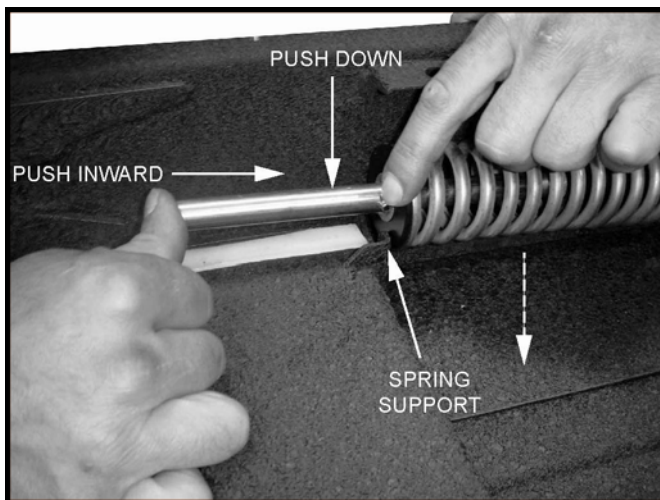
SPRING ASSEMBLY (LH SIDE SHOWN)
